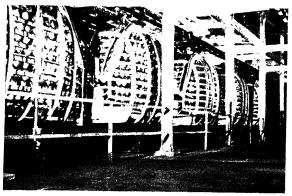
Clam-type oven for automobile bodies (Ford Motor Co.)
